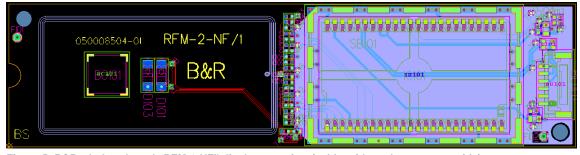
B&R wireless board "RFM-2-NF" diaphanous view (solder side and component side)
